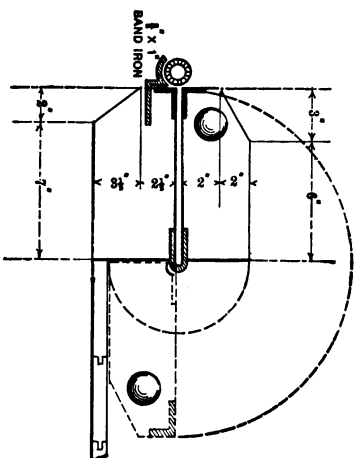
Enlarged Section through A B, Front View, Fig. 1.
